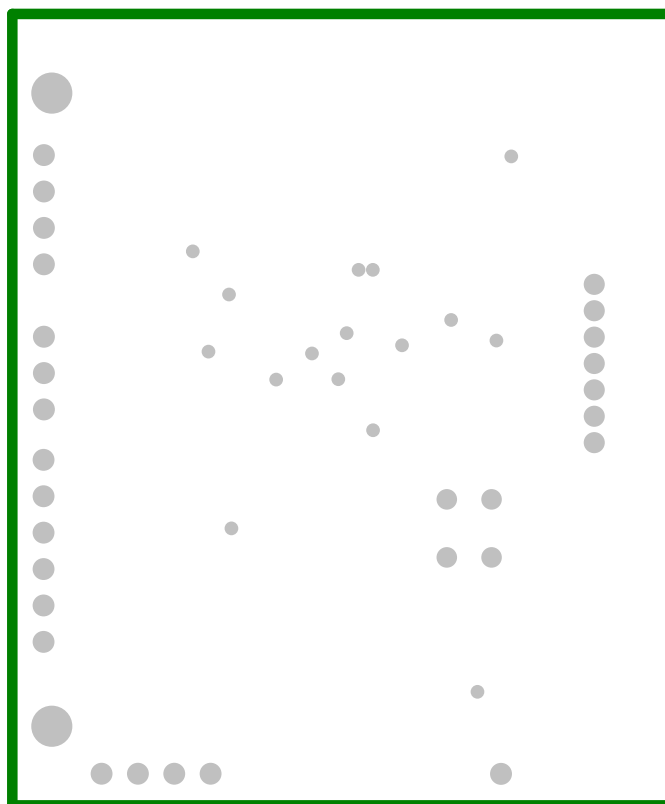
ADS124S18EVM PCB Layout - internal Ground (GND) layer 1
